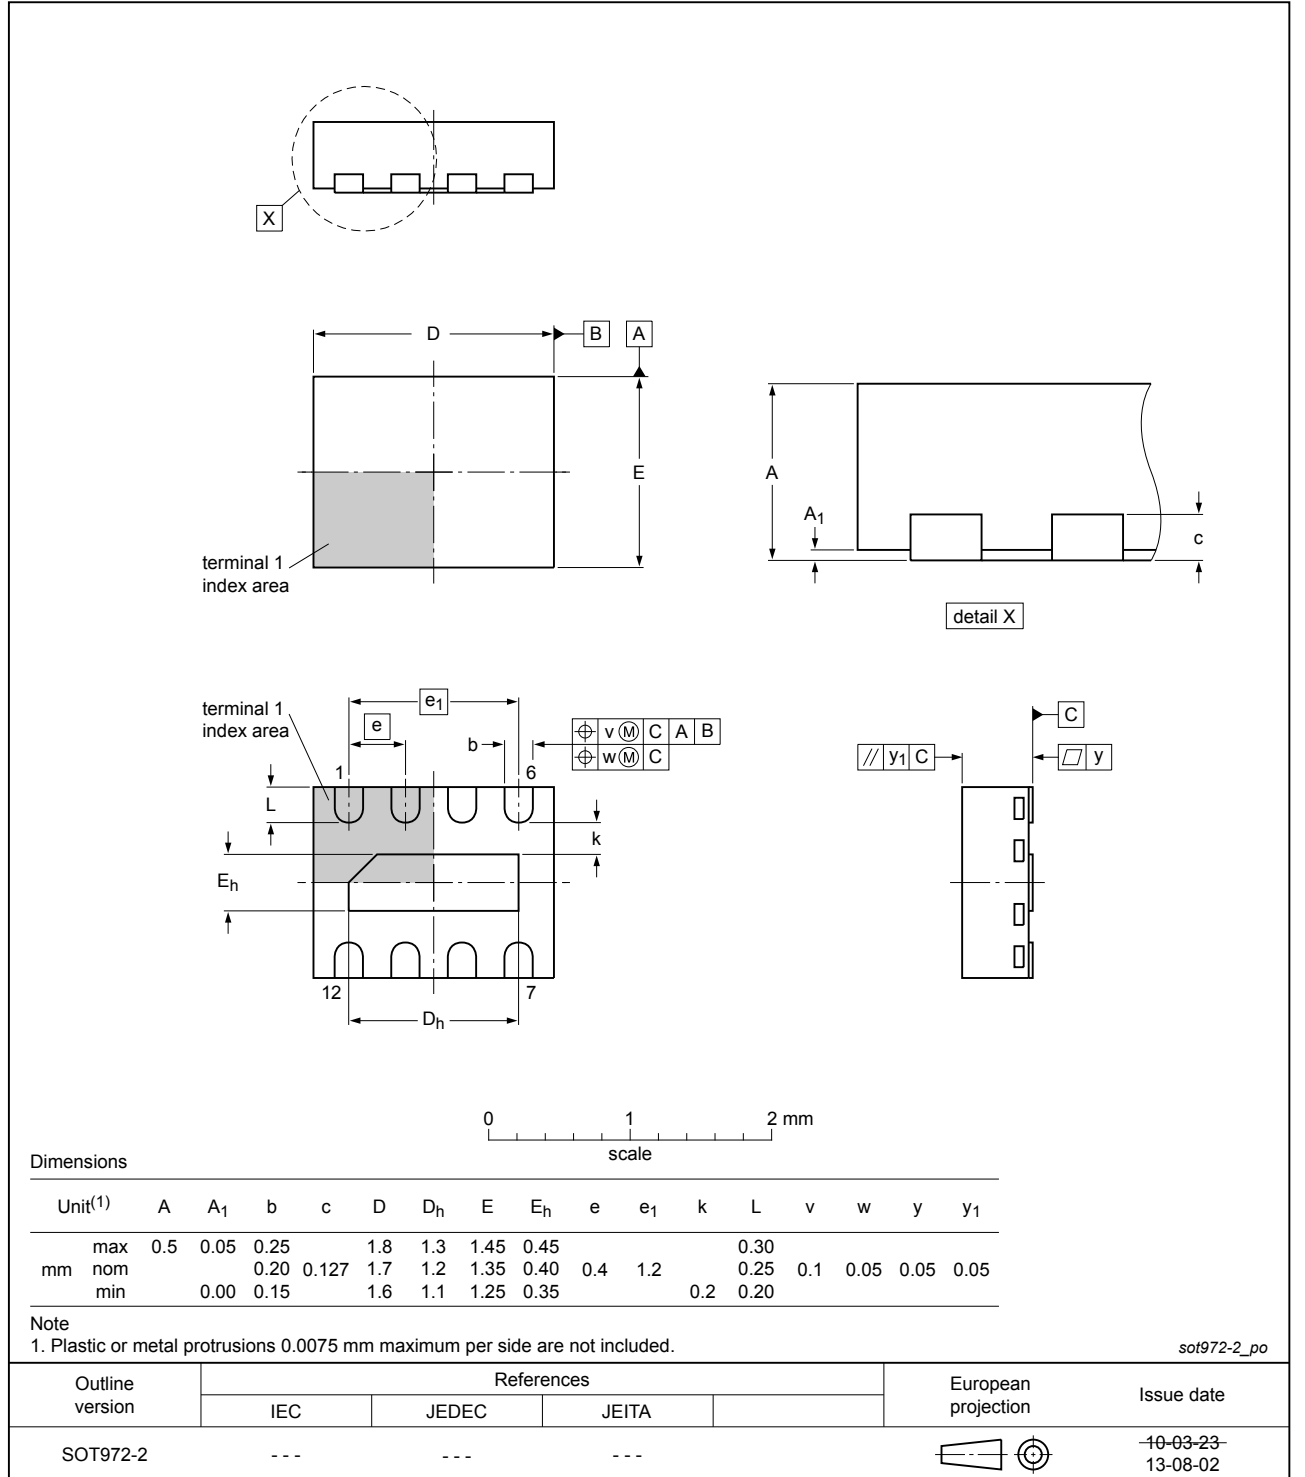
Package outline DFN1714-8 (SOT972-2)
